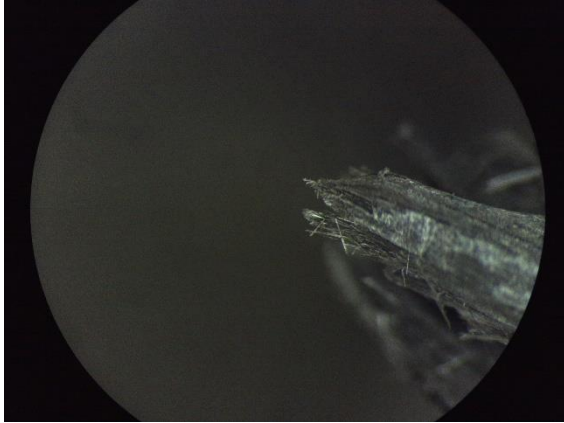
17 deg. loaded specimen. Detail of inwards coiling frond.
